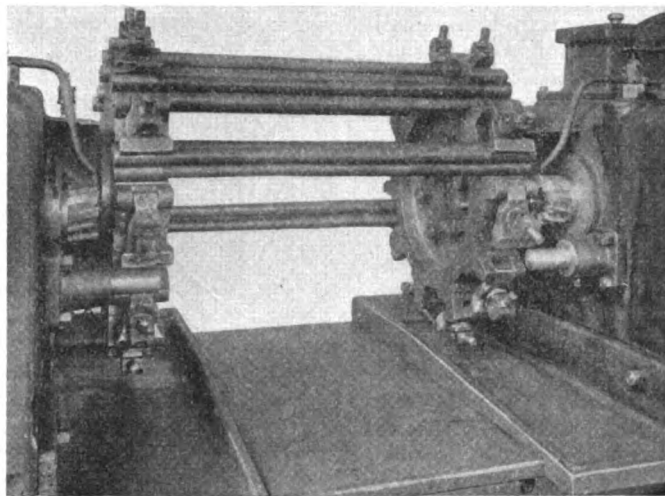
Fixtures for holding shafts for facing off ends, with automatic unloading device
